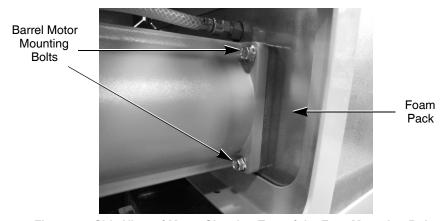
Side View of Motor Showing Two of the Four Mounting Bolts
